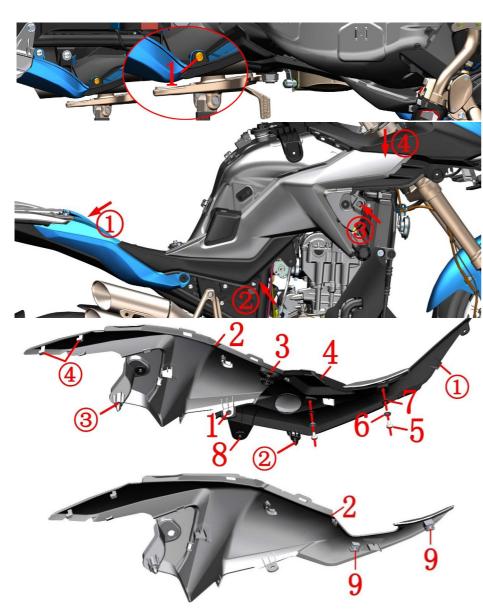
SI	DE COVER	Right side cover upper component	CHK	40)
